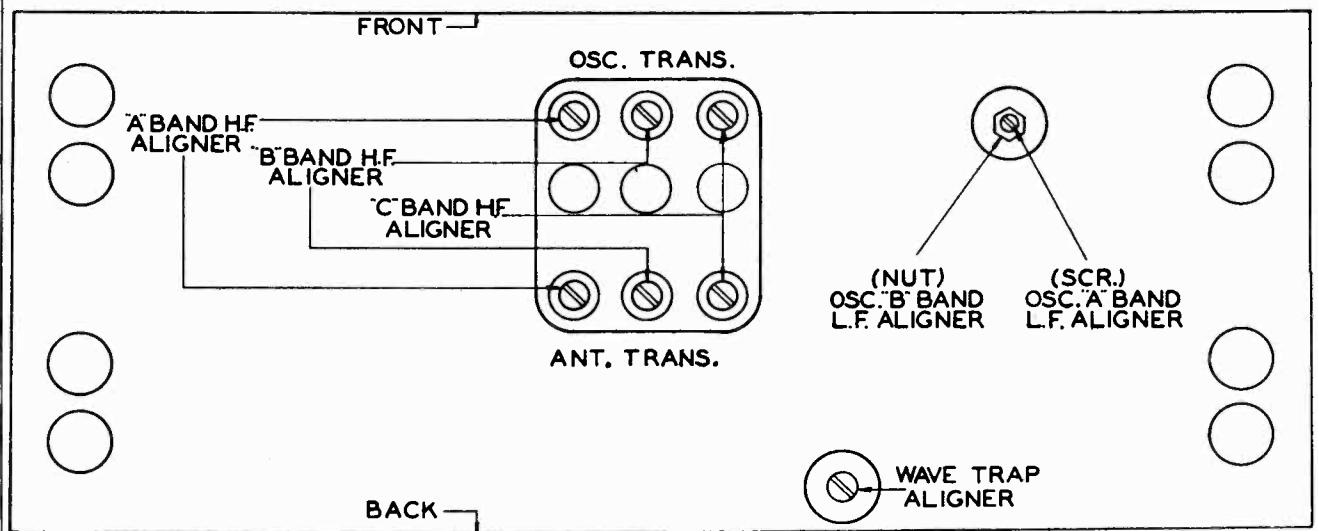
View Through Chassis Mounting Shelf Showing Adjusting Screws for R. F. Aligning Capacitors.
